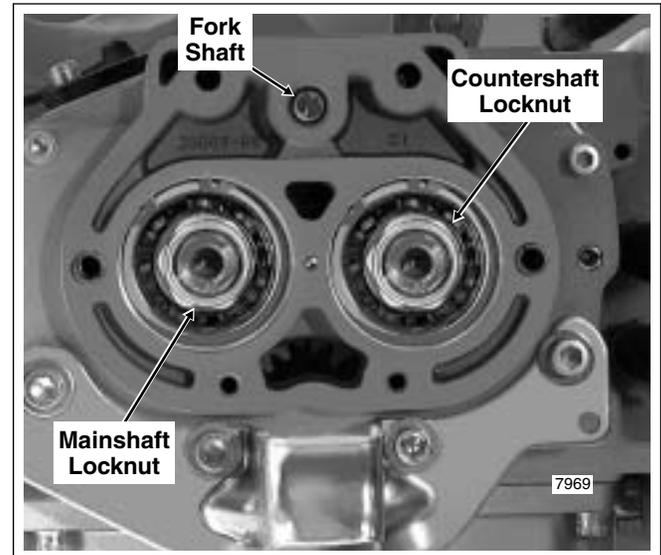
Remove Mainshaft/Countershaft Locknuts
